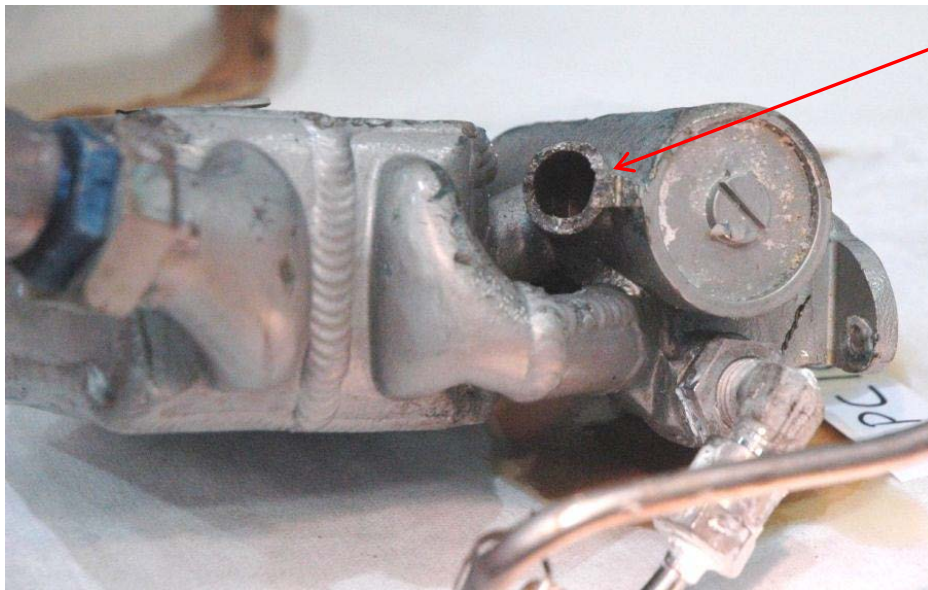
Accessory Gearbox (AGB) – Dissolved, Exposing Internal Components
